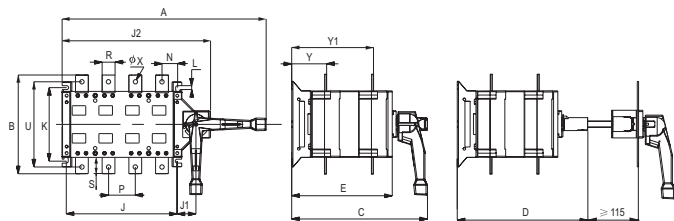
Installation dimensions of changeover switches 63 A - 630 A
